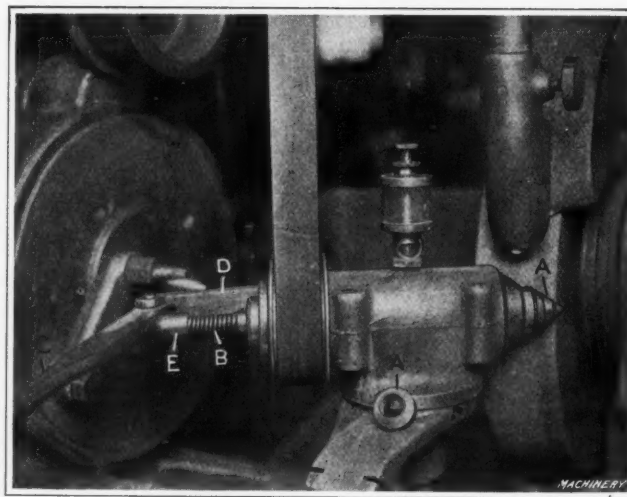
Improved Fixture used in holding Cone for grinding, that greatly increased Production over Former Method
